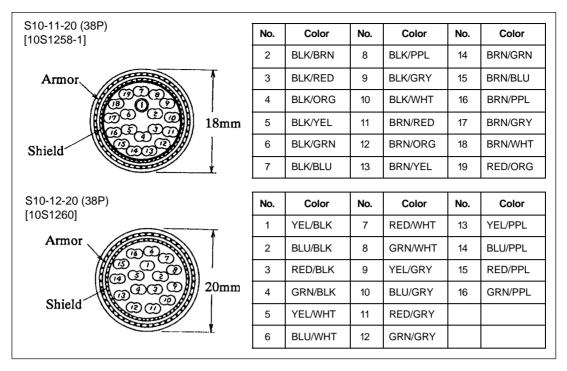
Construction of cables S10-11-20 and S10-12-20
